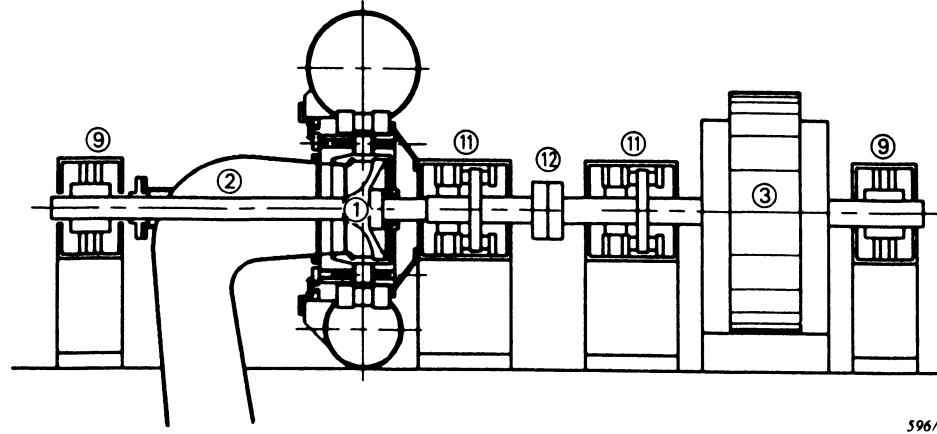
Example of a horizontal machine (Francis turbine) with four bearings
